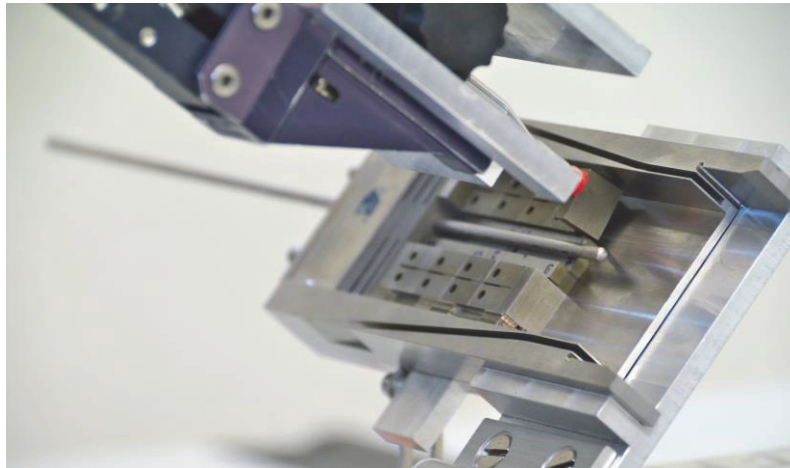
Mounting of SSTT specimens into the assembly tray of an IFMIF capsule using a vacuum gripper operated by a standard manipulator in a hot cell simulator.
